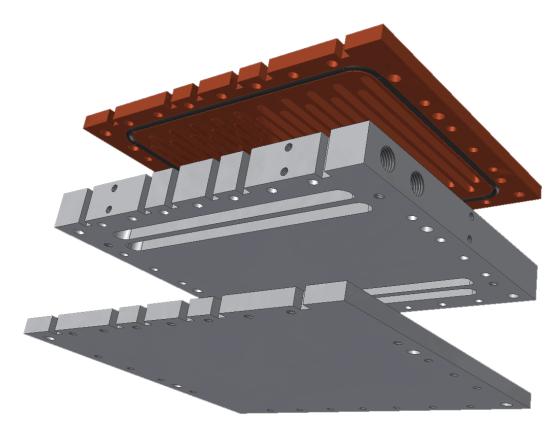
The Cooling element consists of three parts: Lowerplate, Coldplate and Copperplate
